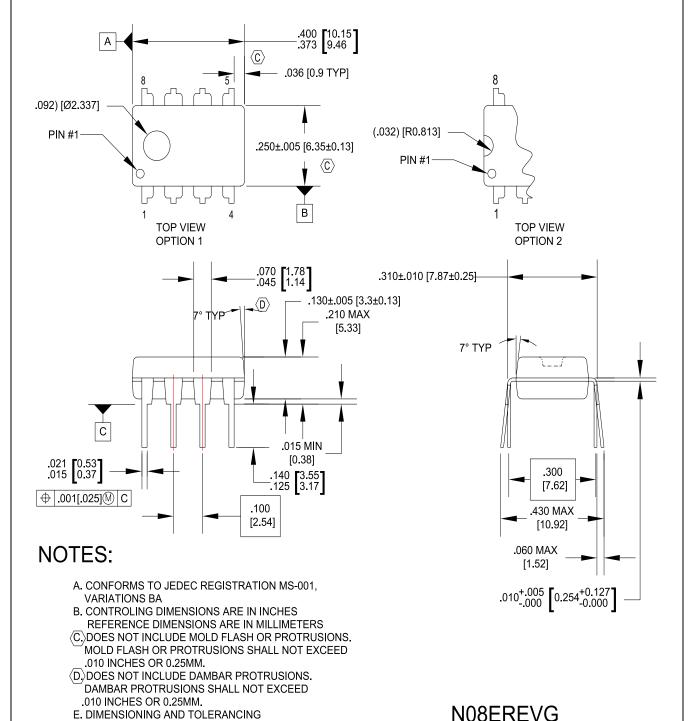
8-Lead Small Dual In-line Package (DIP)
